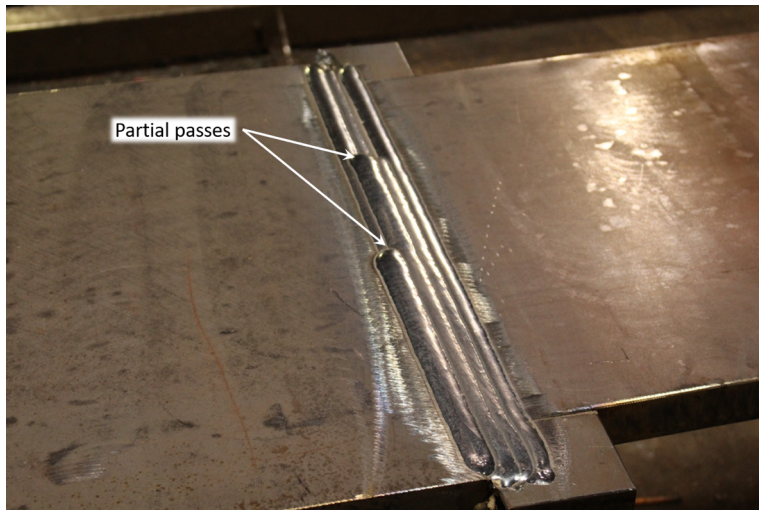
Photograph of the weld surface showing partial passes.
